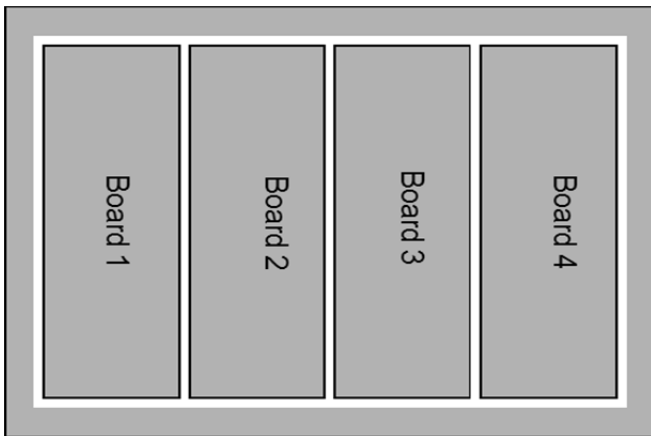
Typical PCBA panel layout for consumer products. It is important to ensure that the overall stretch/shrink tolerance is no more than 0.05mm.
